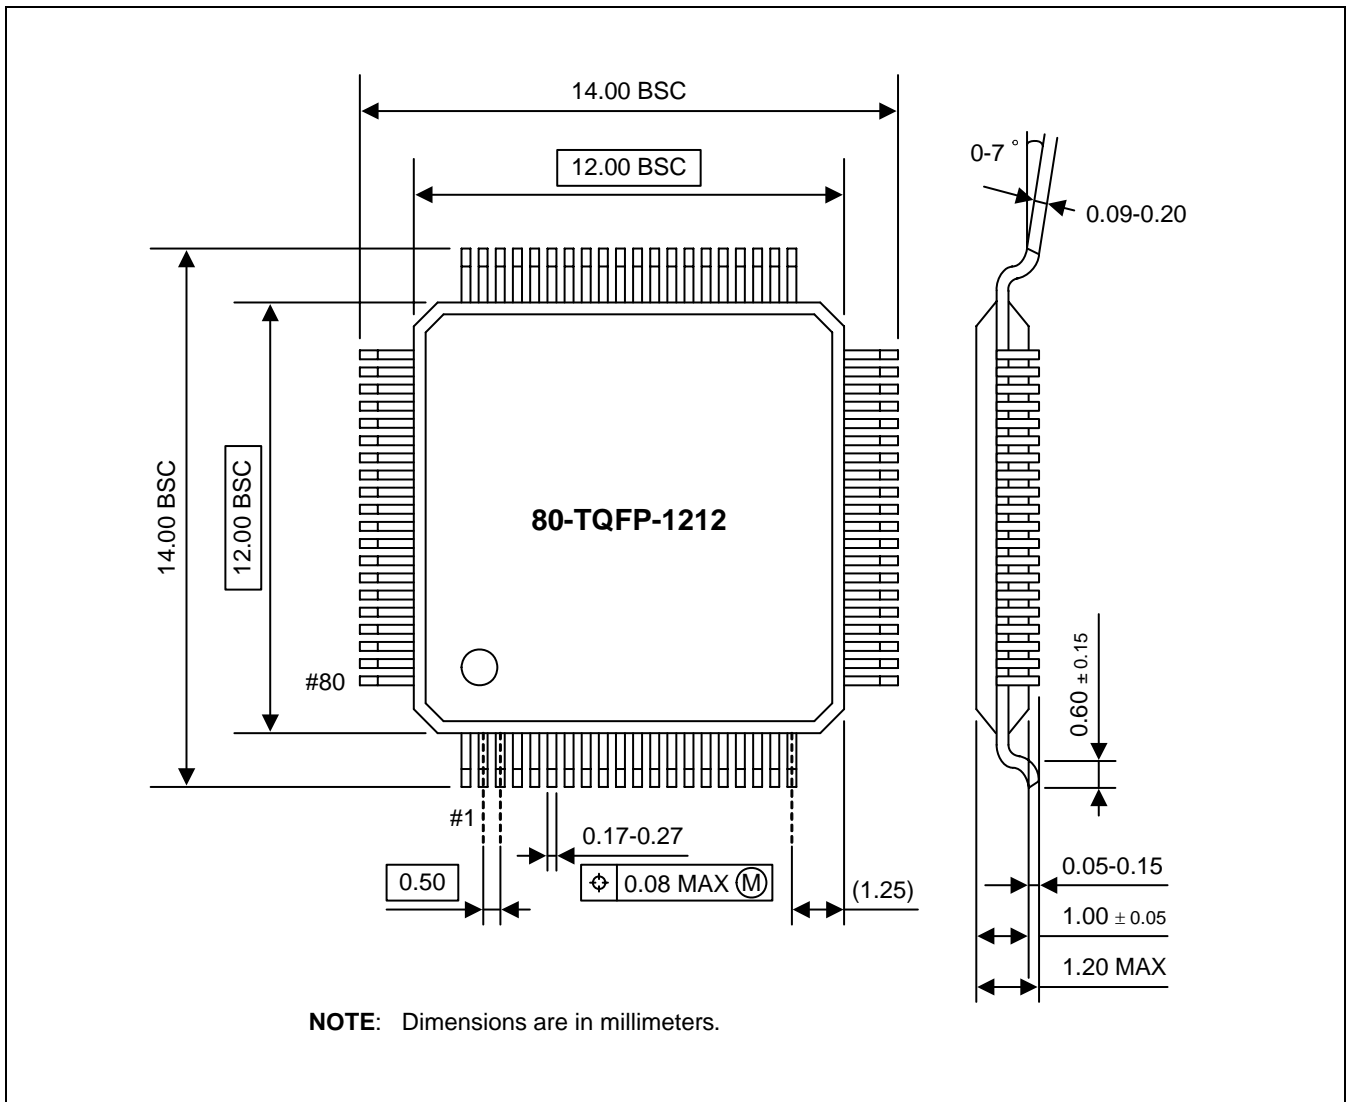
S3C84MB/F84MB 80-TQFP Standard Package Dimension (in Millimeters)
